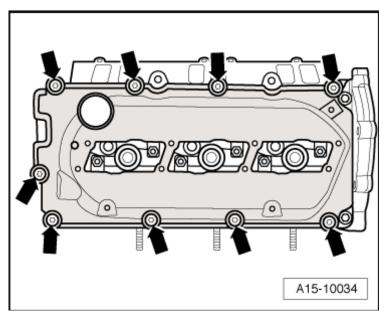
Identifying Cylinder Head Cover, Tightening Specifications and Sequence
